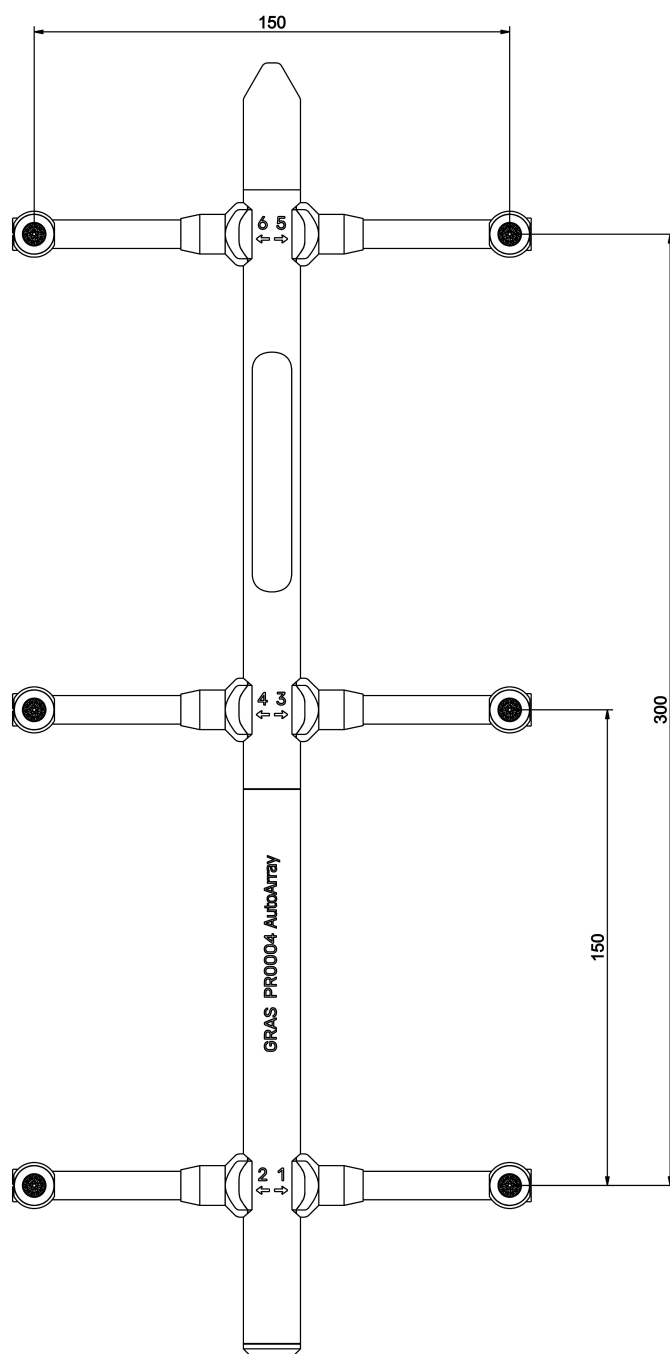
PR0003 AutoArray – basic dimensions in millimeters.
